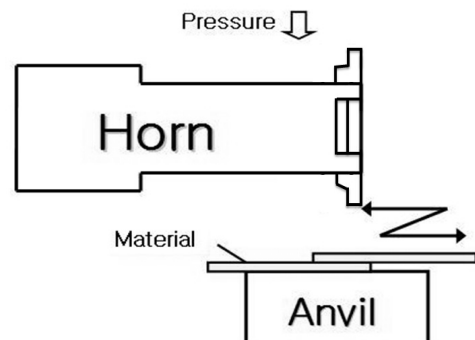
Basic principle of ultrasonic metal welding
